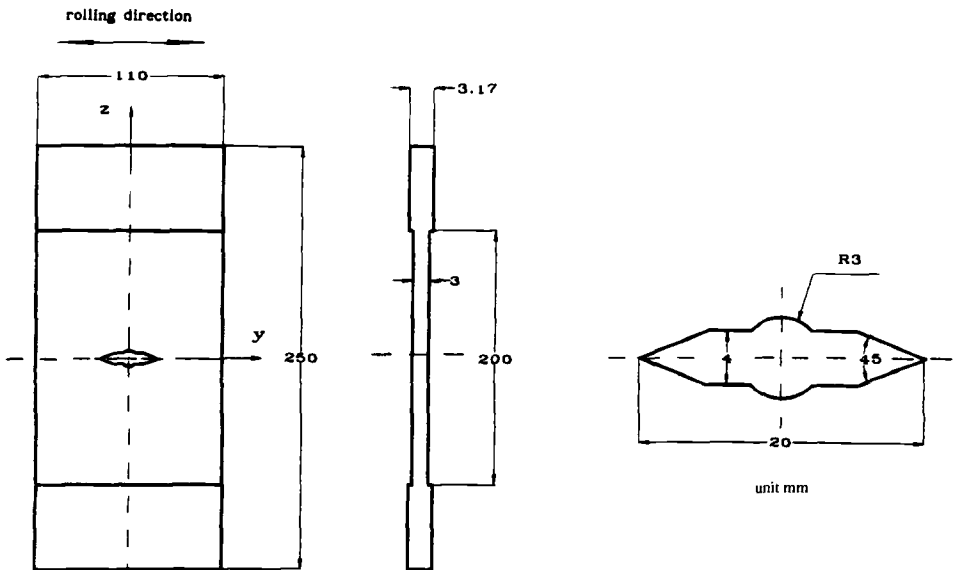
Center-cracked specimen for fatigue crack propagation.
